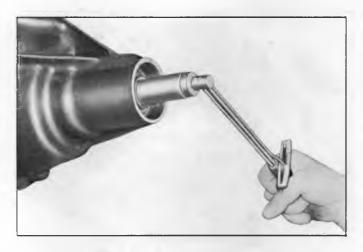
A-Measuring Drive Pinion Bearing Rotating Torque
